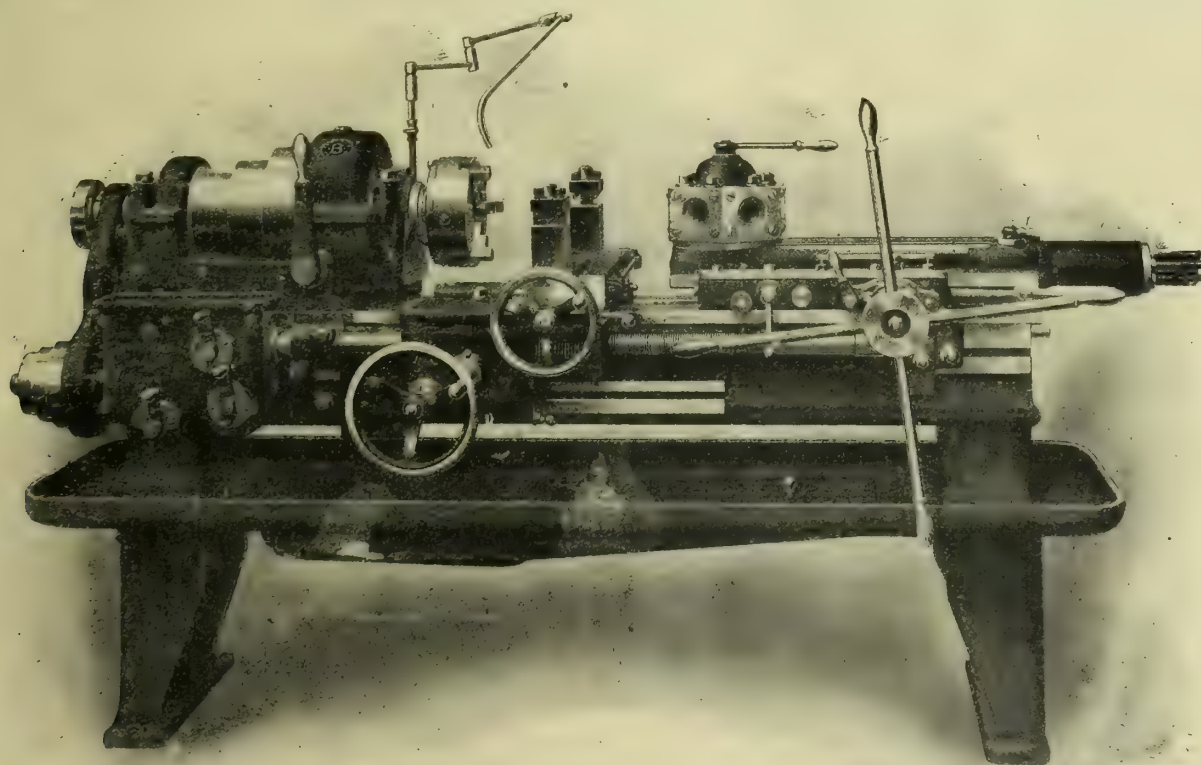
7½ IN. CENTRE FRICTION-GEARED CAPSTAN LATHE. MESSRS. H. W. WARD & CO., LTD., BIRMINGHAM.
